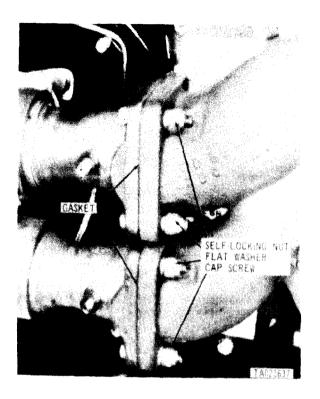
Disconnecting or connecting exhaust pipes at turbine housing.
